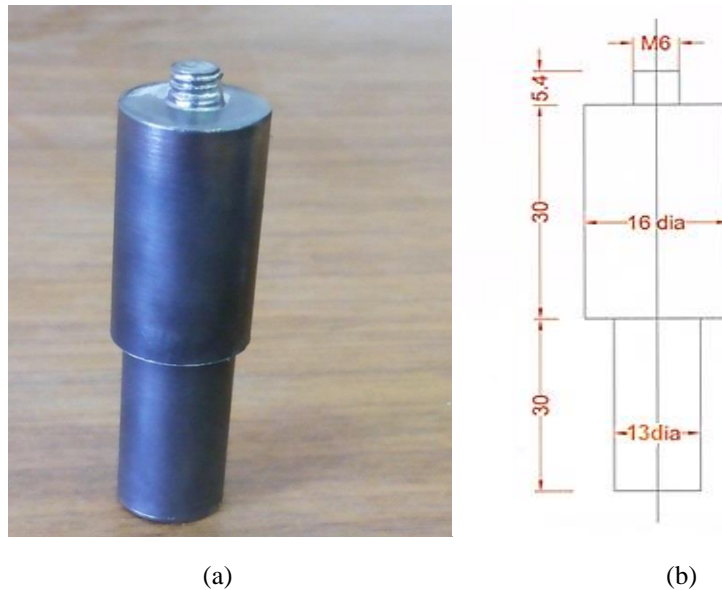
Specification of the Tool: (a) Tool picture (CY) (b) Tool dimensions
